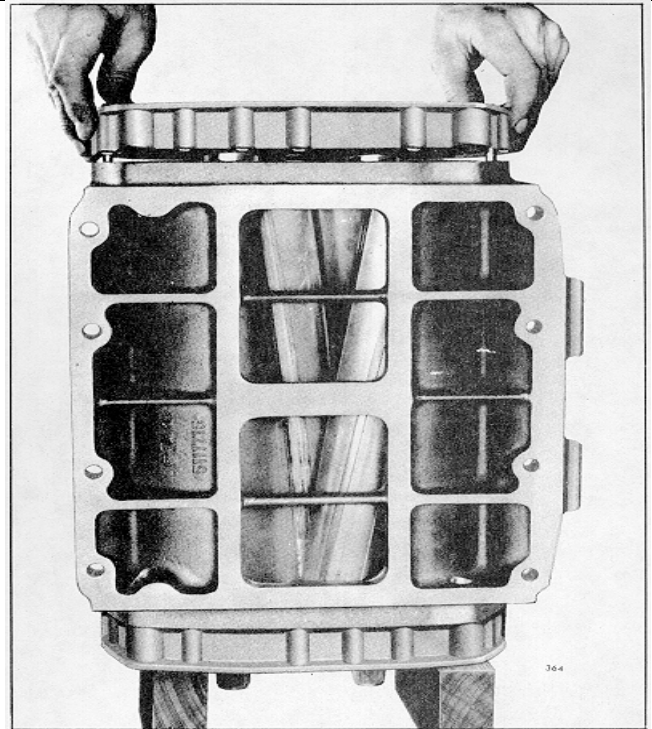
Installing Front End Plate on Blower Rotors and Housing (Ring Type Oil Seals)
